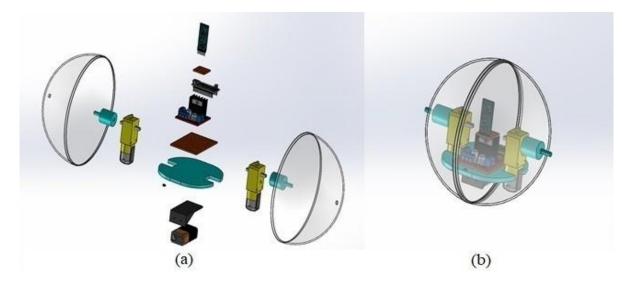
(a) Exploding view of spherical robot (b) assembled view of spherical robot
